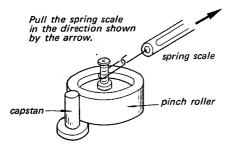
Pinch roller pressure adjustment (2)
